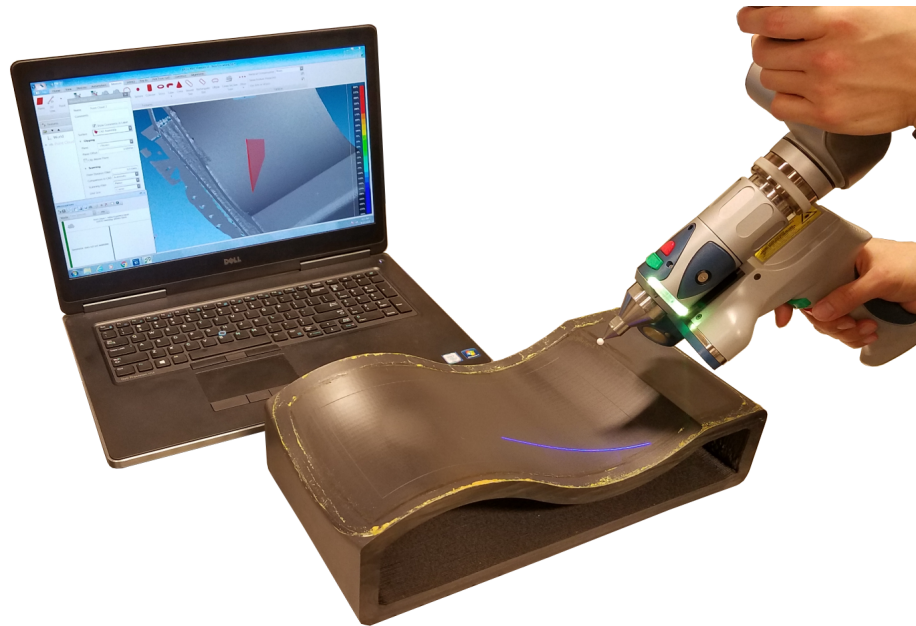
Surface measuring of the mold life experiment tool using 3D laser surface scanning technology.
